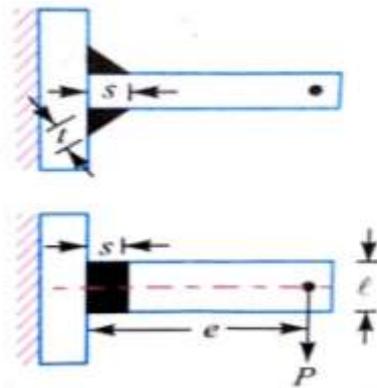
Eccentrically Loaded Welded Joints
